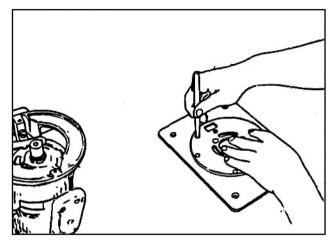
Use router base plate as a template to mark the location of each mounting hole onto the table plate.
